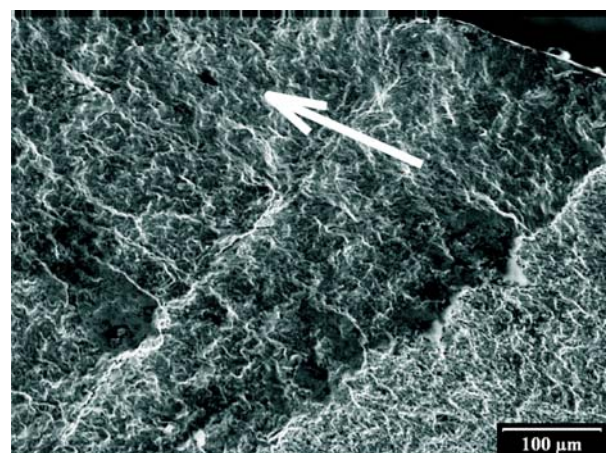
Fracture surface without secondary SCC cracks in specimen X77 loaded in air
